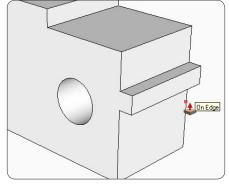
Using the Push/Pull Tool to create the hole. The "On Edge" label next to the tool tells you when you've pushed far enough.
